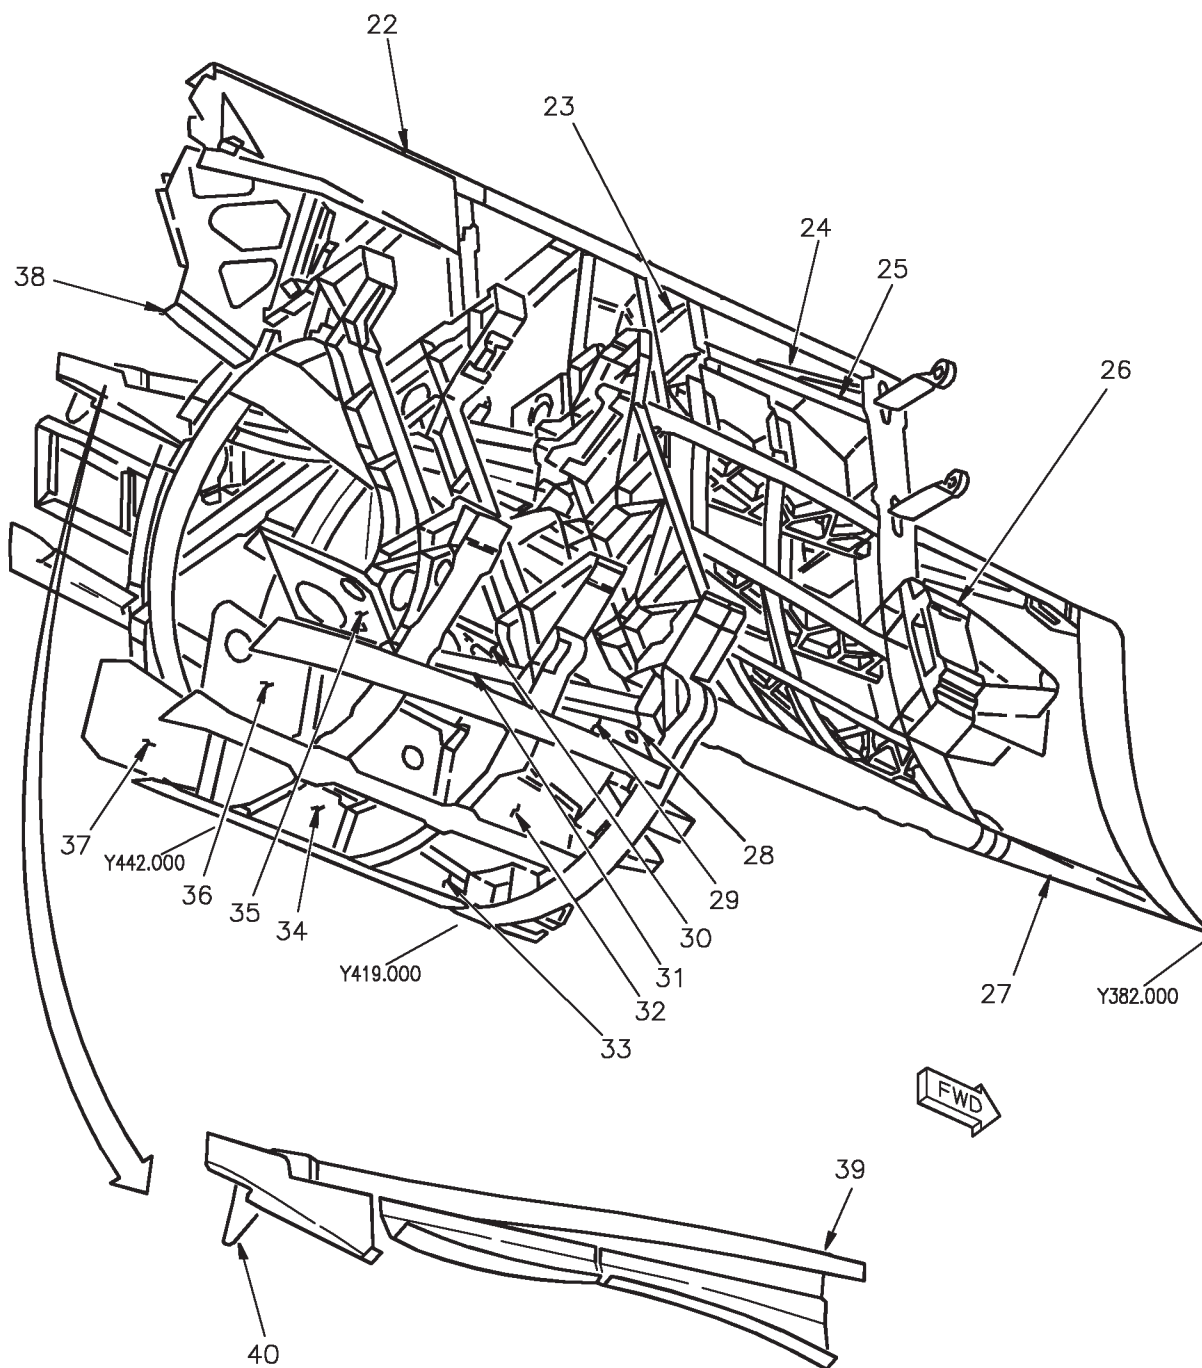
Air Inlet Bulkheads, Formers, Longerons and Stringers (Sheet 2)
